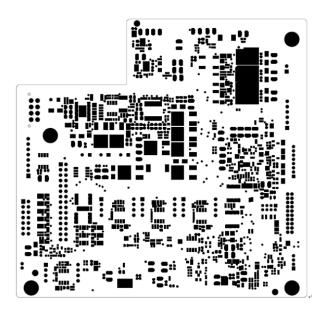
EFCS Monitoring Board, Bottom View
